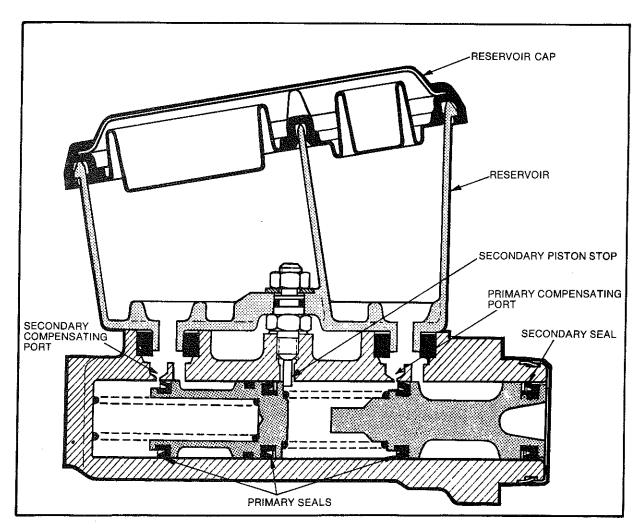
Cross sectional view of PBR tandem brake master cylinder
